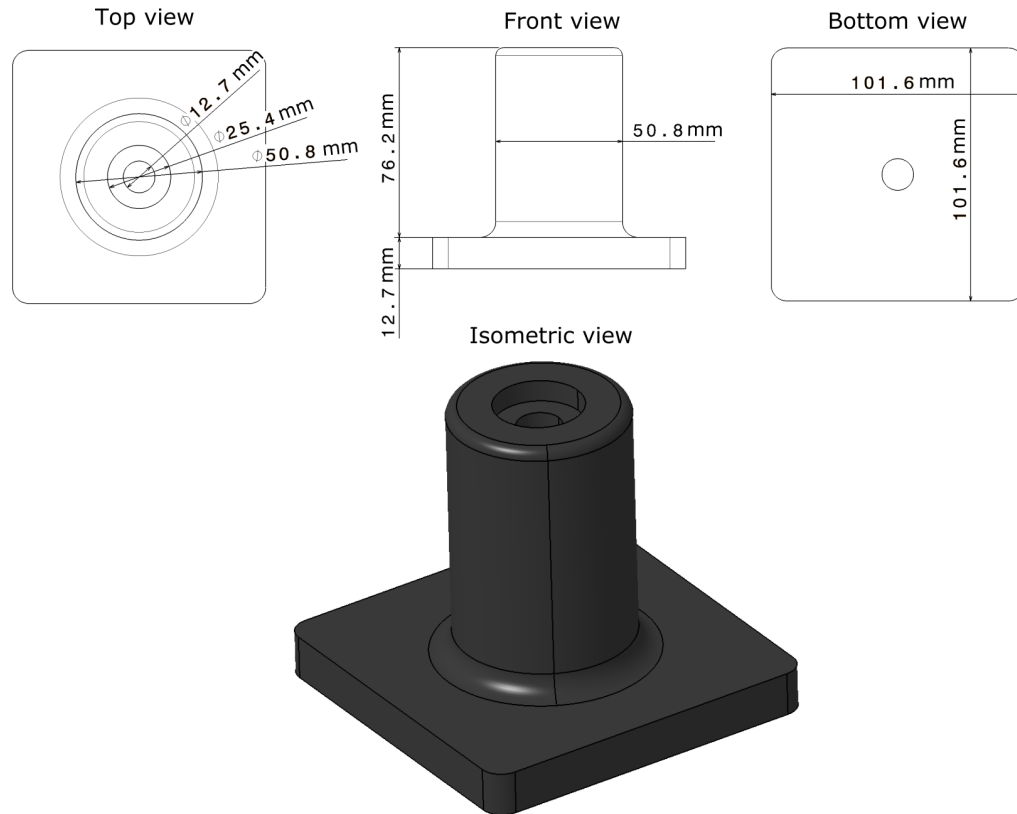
Orthographic projection of the demolding test tool with dimensions.
